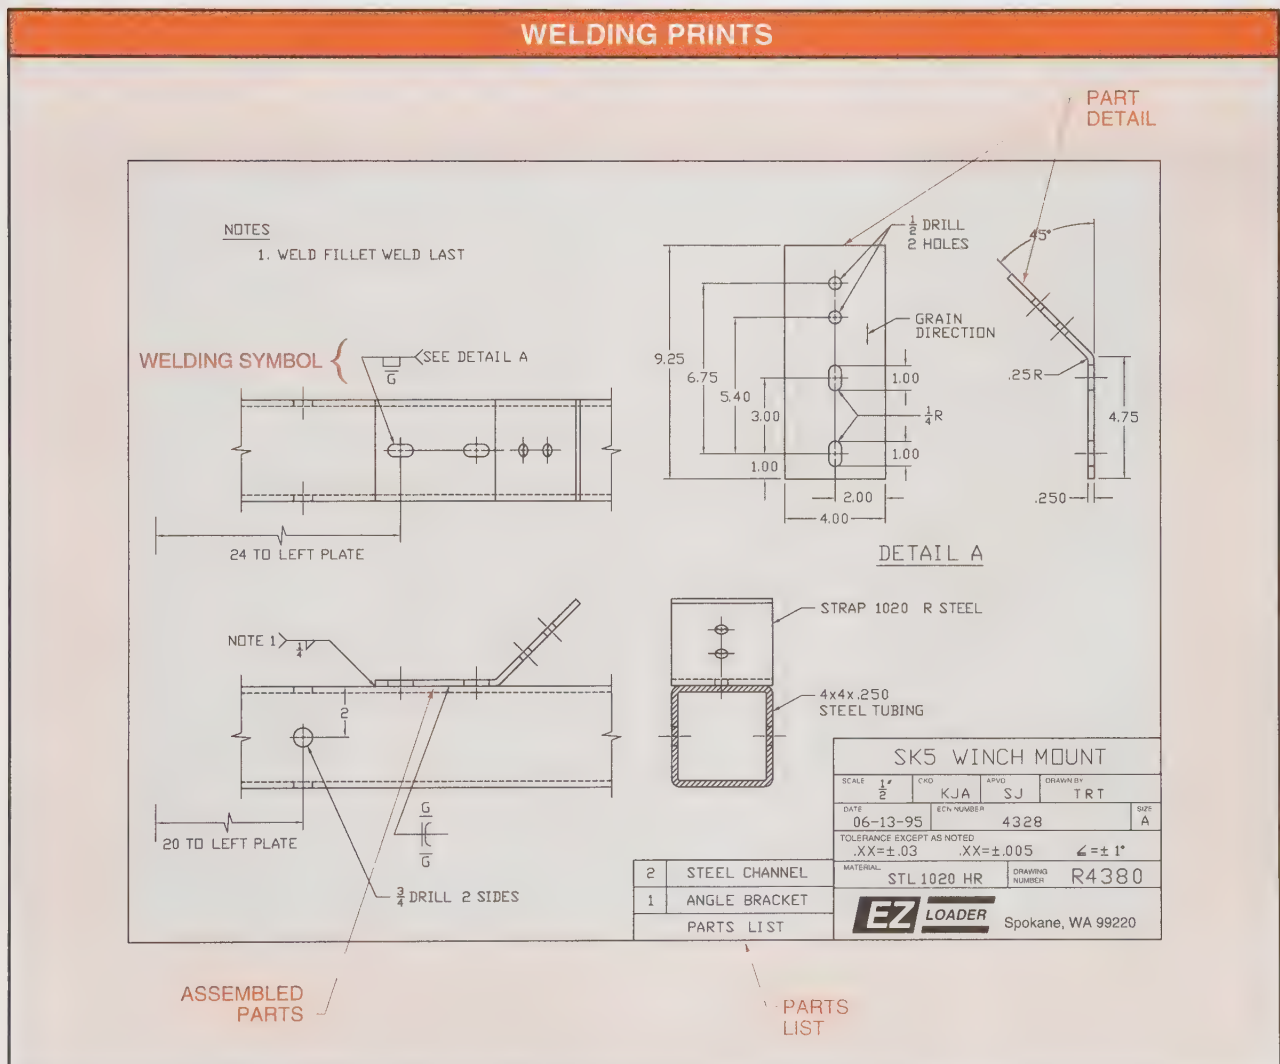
Welding prints show assembled parts and may show part details as well.
